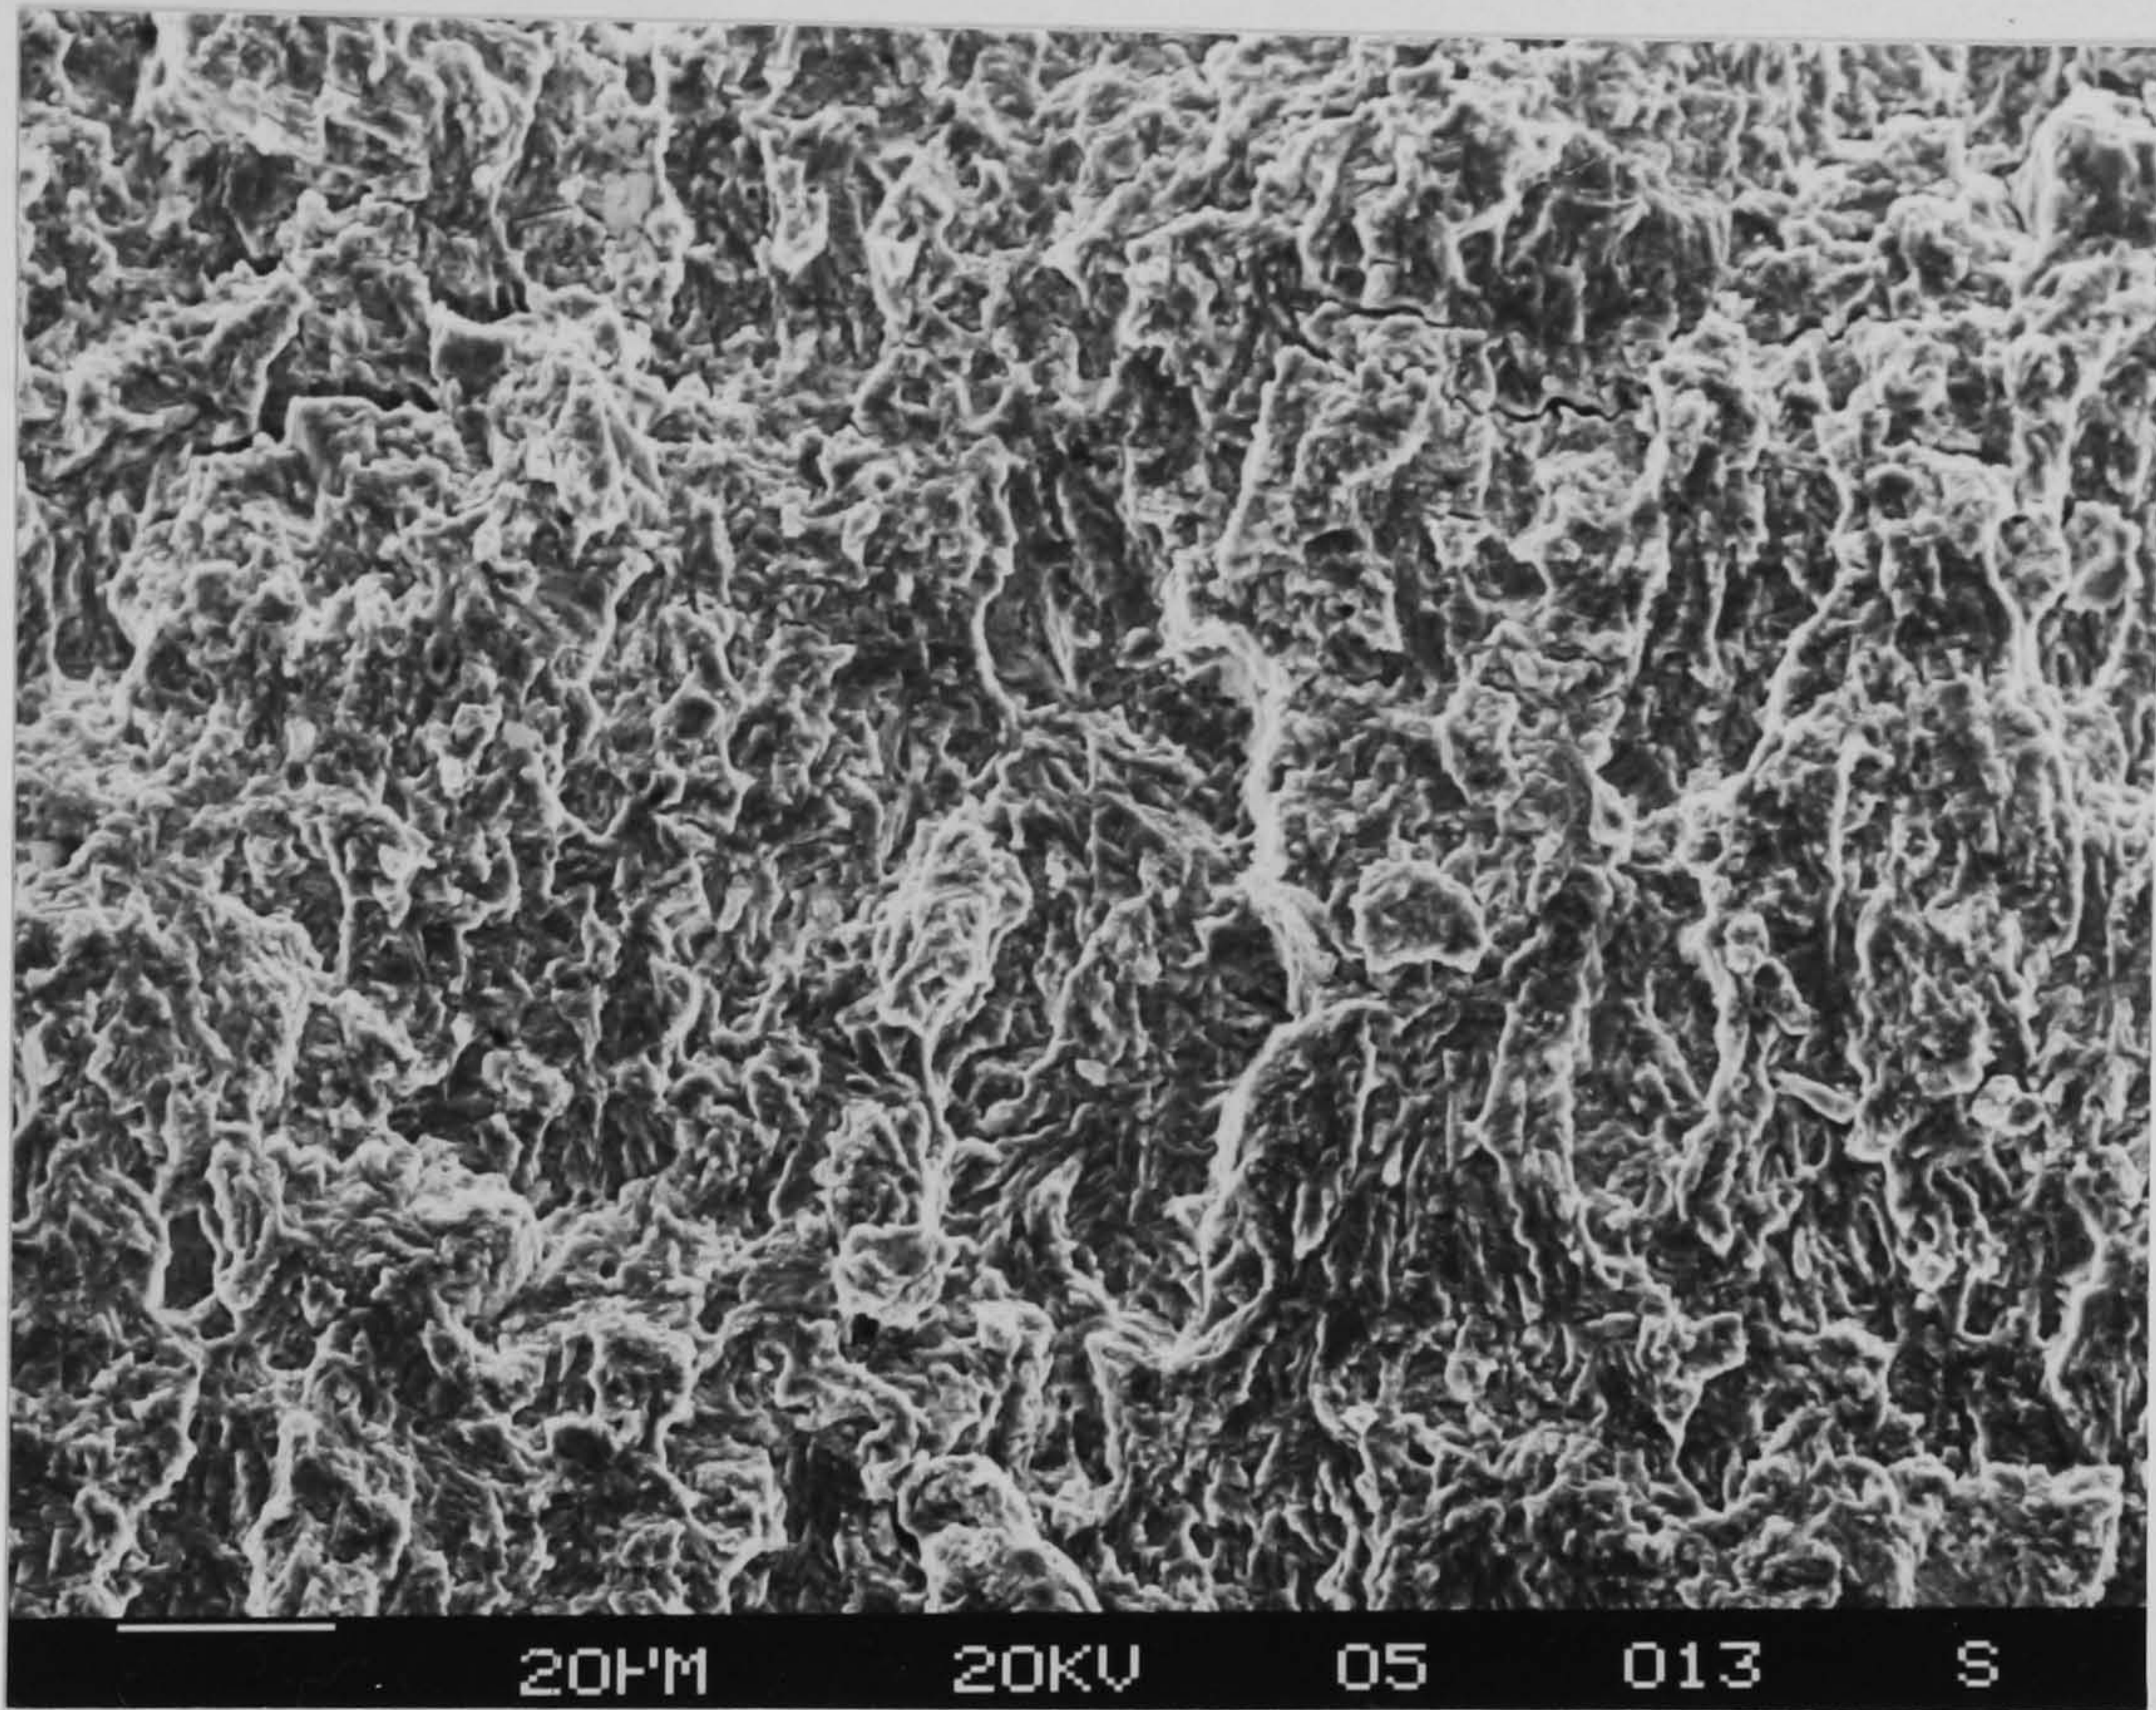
BS 4360 grade 55F fatigue crack fracture surface .
